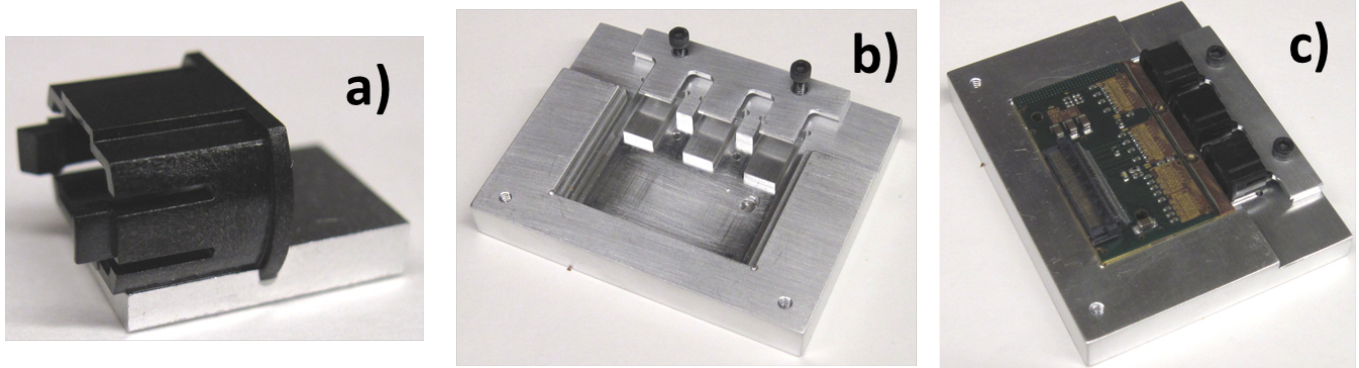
Photographs of the optical connector (a), gluing jig (b), and gluing jig with opto-board (c).
